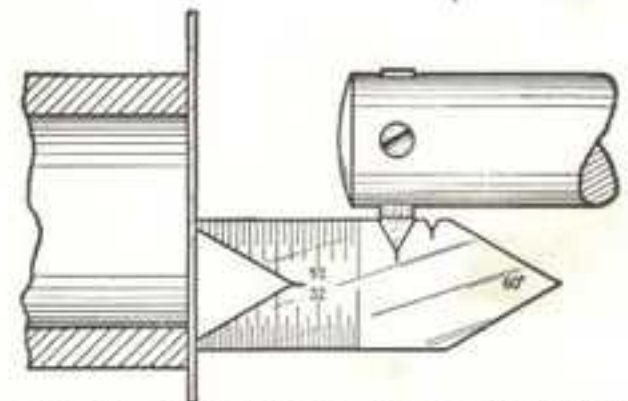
Cutter Bit Set Square With Work for Cutting Internal Screw Threads
